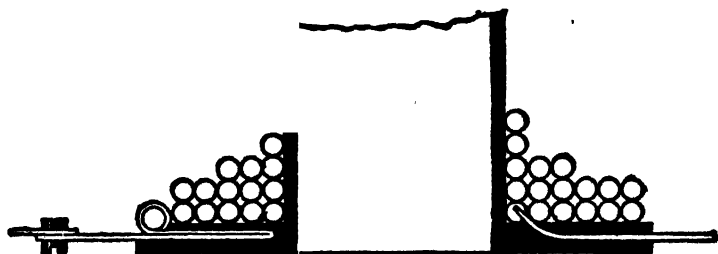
One mode of bringing out the coil ends, in which copper strip is laid in behind an end sheet of insulating material.
